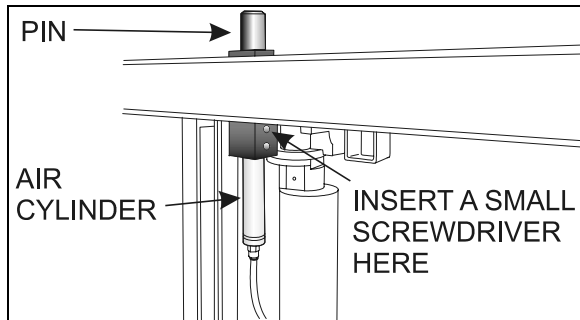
SECURITY PIN AIR CYLINDER REMOVAL
